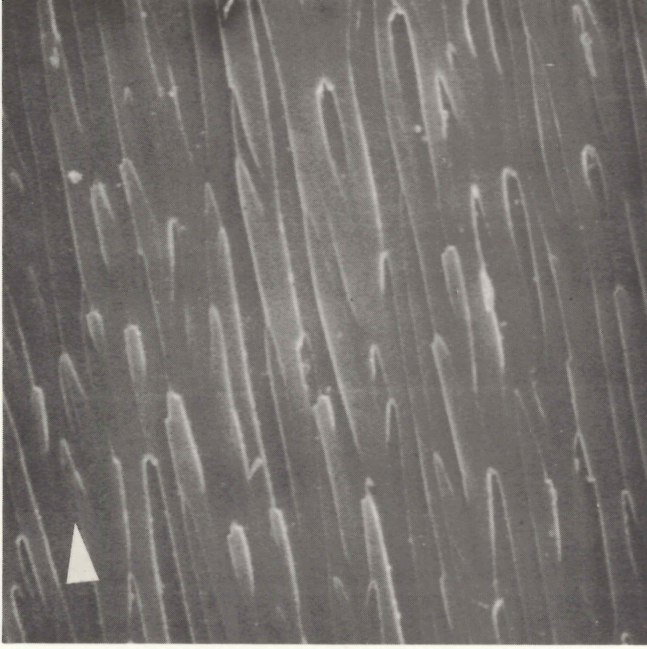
& 9 Fatigue Fracture Surfaces
